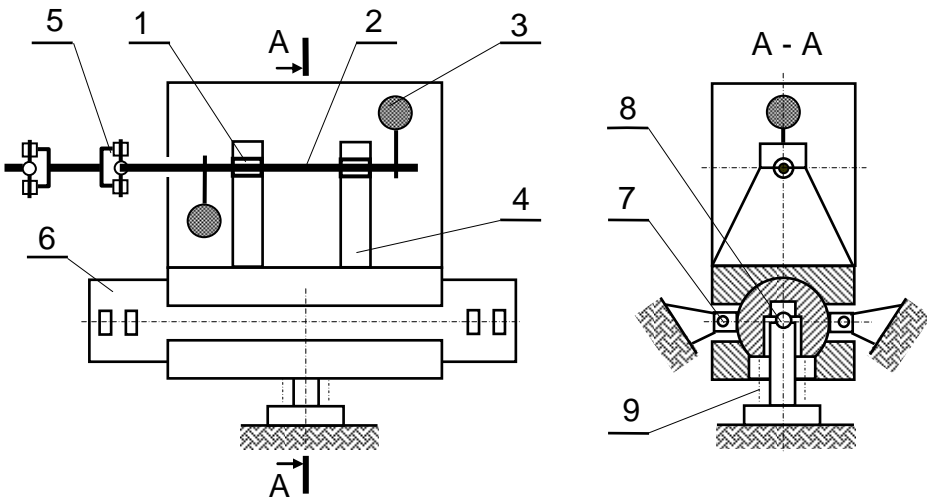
Scheme of head unit of the MWO machine with rotating load vector: 1 – investigated bearing, 2 – shaft, 3 – unbalanced masses, 4 – bearing housing, 5 – Cardan universal joint, 6 – stabilising bar, 7 – flexible joint, 8 – ball joint
